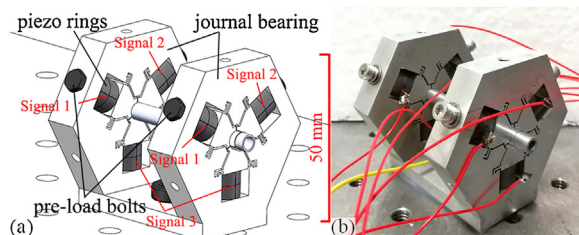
Design of the active non-contact journal bearing with six driving units: (a) 3D model and (b) functional prototype.
